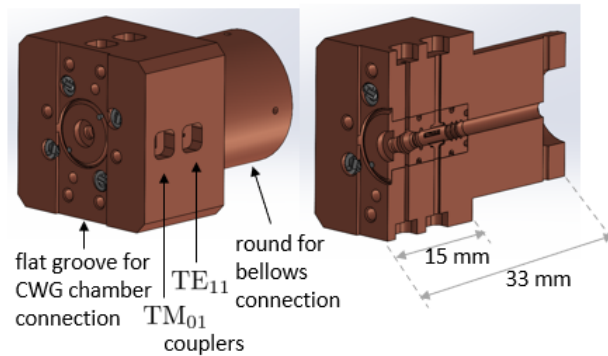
Mechanical design of the transition section showing a combined assembly of the electroformed core and copper core holder.
